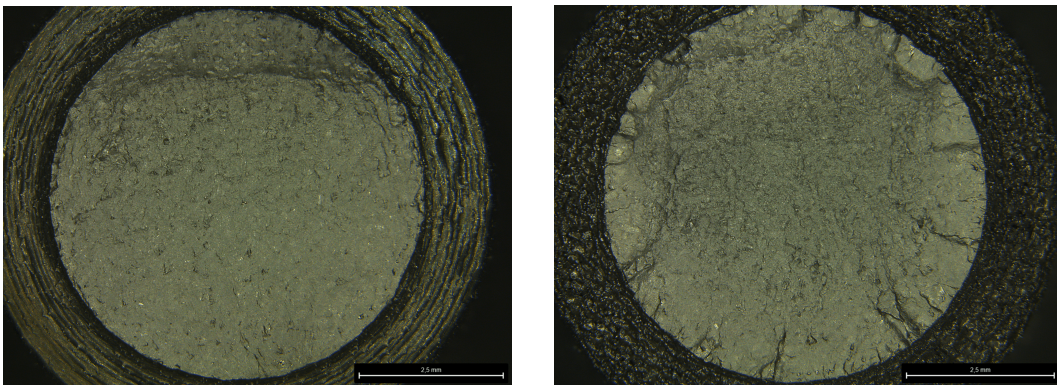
Fracture surface specimen A2.2:4 (left) A2.2:5 (right).
